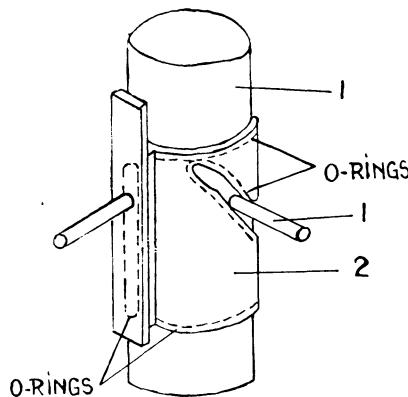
O-ring seal for helical motion. After Verba¹²⁶⁶ (*Courtesy of The American Institute of Physics*)
